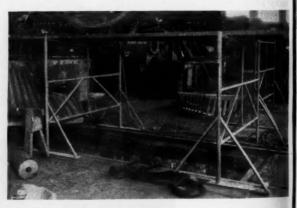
Welded scaffold supports for superheater flues.
